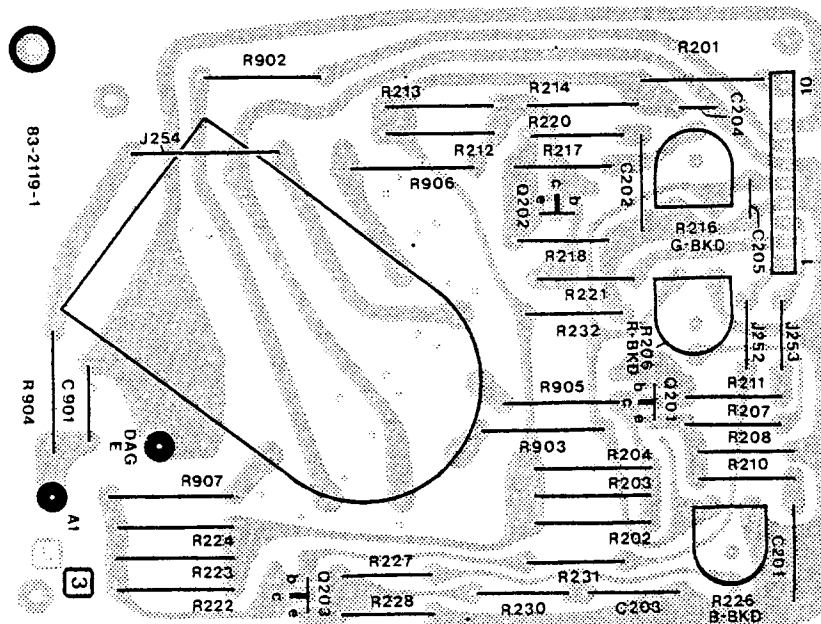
(a) 170 Series Tube Base p.w.b. (mini neck) - component side
